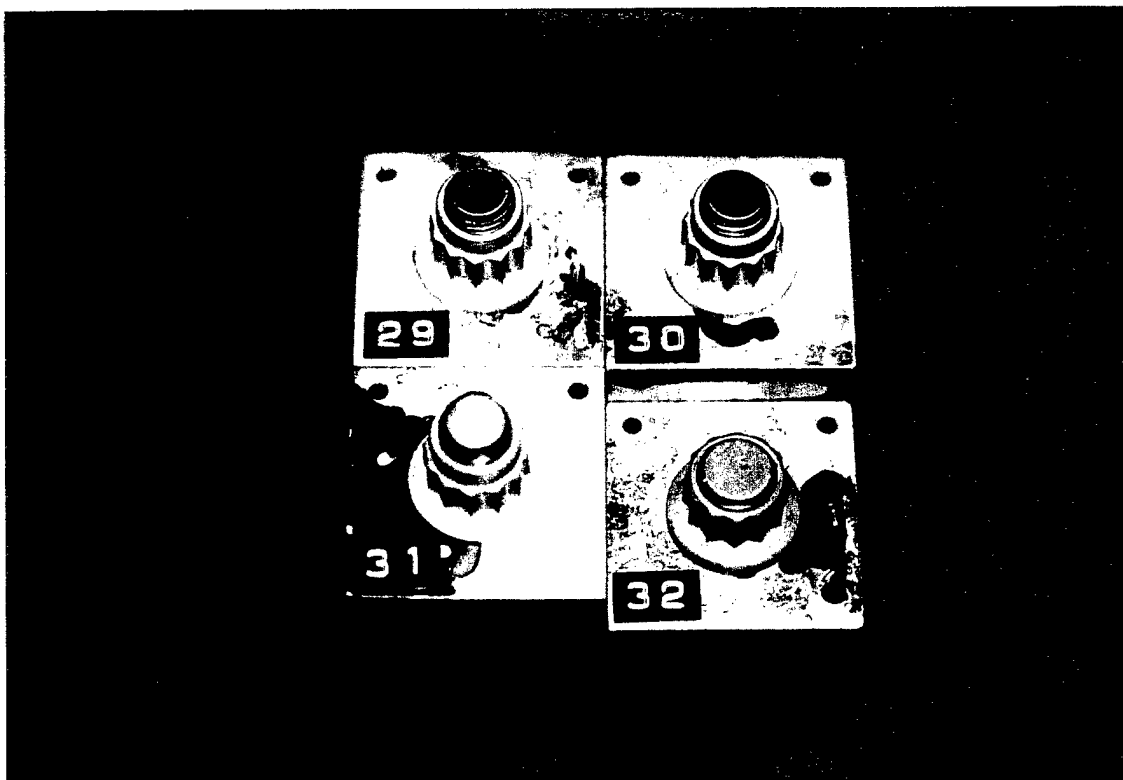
H11 Chromium Hot Work Tool Steel Nuts With MIL-C-16173 Grade 4 Corrosion Preventative Compound Before Salt Spray Exposure. Reduced 25%.
